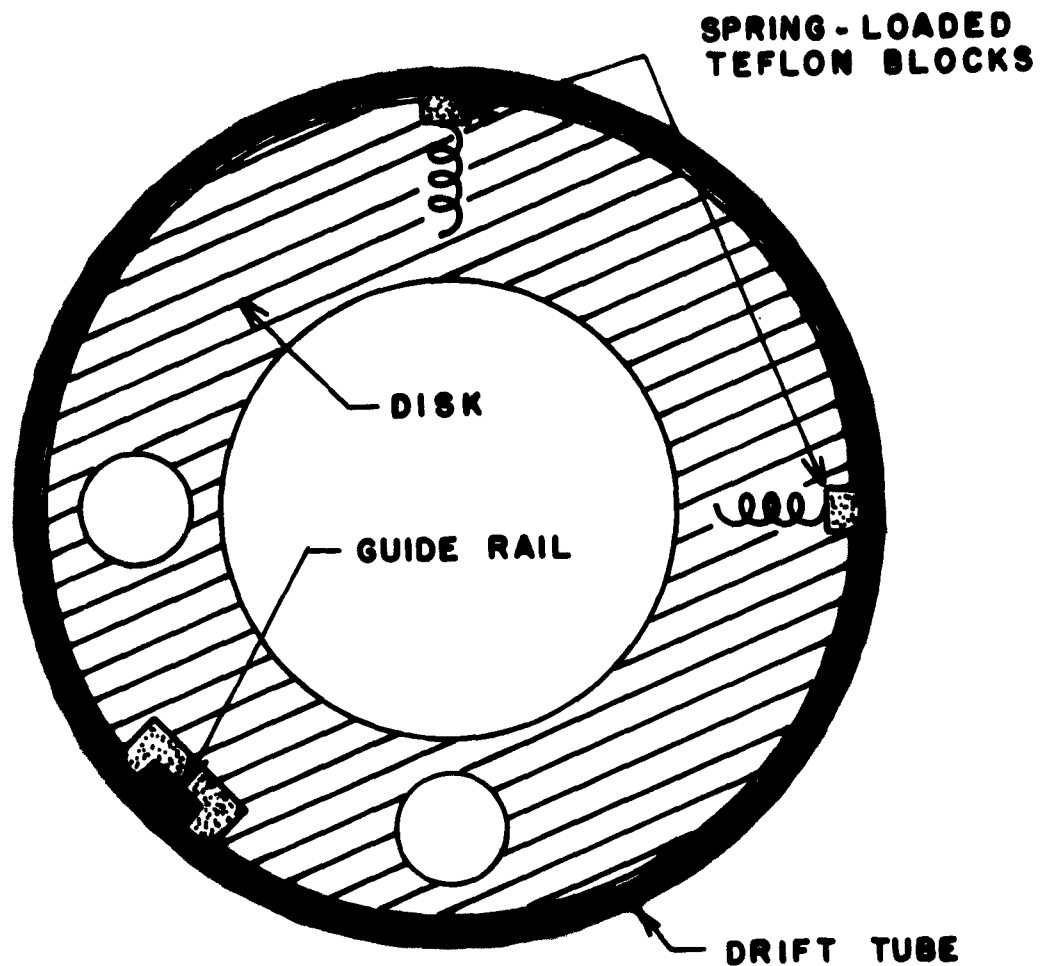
Disk Which Centers Faraday Cage Assembly.
